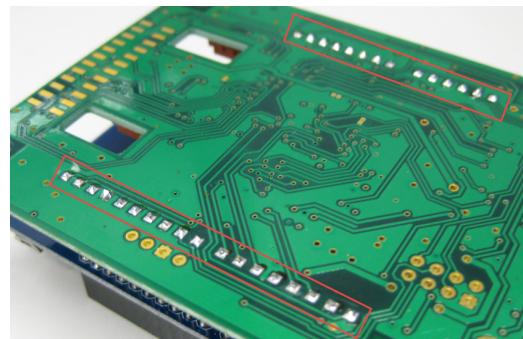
Four Arduino Headers Soldered to Board (Bottom)
